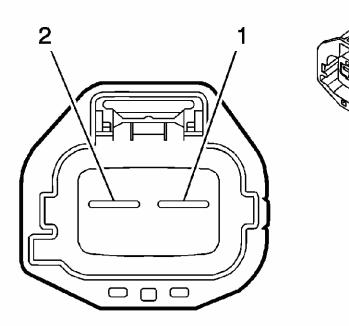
Left Cooling Fan Connector End View Courtesy of GENERAL MOTORS CORP.
